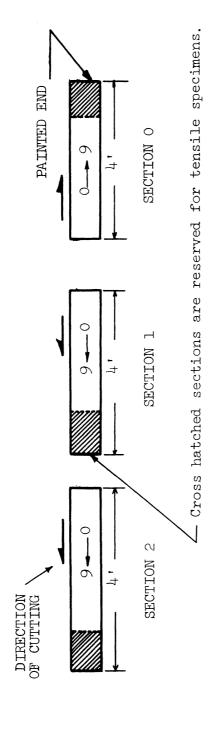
Section and Position Numbering Scheme for Specimens as Cut from Bar.
